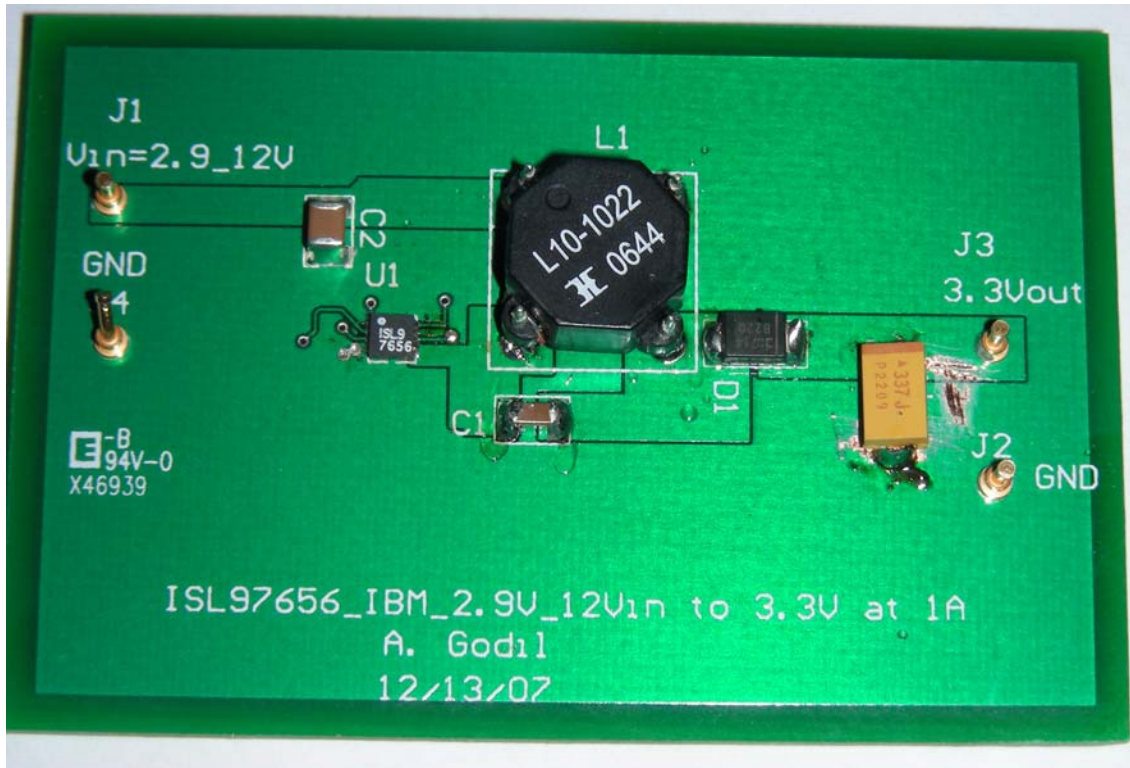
ISL97656 SEPIC TEST BOARD – FRONT SIDE
